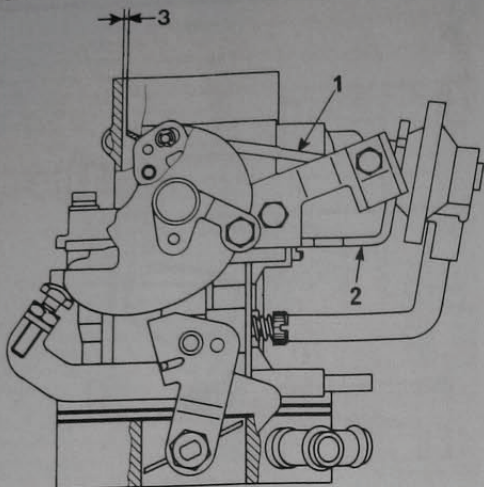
Pneumatic cold start device choke flap opening - Zenith carburettor (Sec 17)
